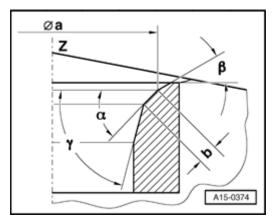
Valve Seats, Refacing Courtesy of VOLKSWAGEN UNITED STATES, INC.
